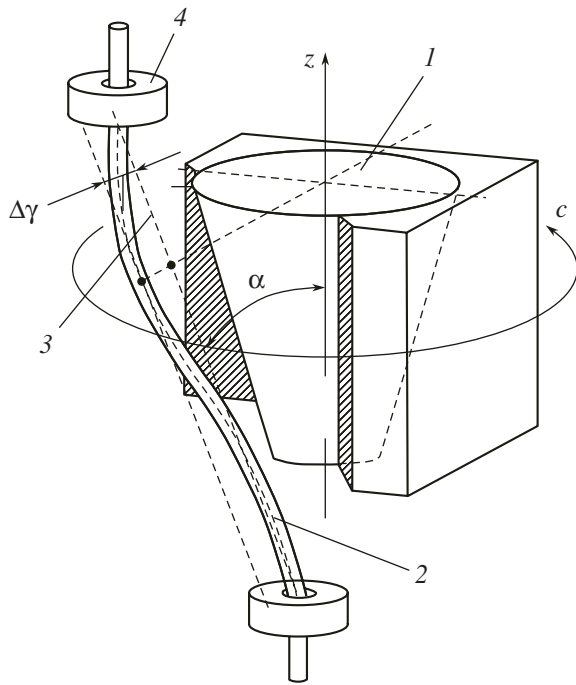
Scheme of the treatment of conical surfaces by virtue of a four-coordinate electroerosion machine: 1 is the treated workpiece; 2 is the wire-electrode tool; 3 is the theoretical position of the WET axis; 4 is the system of the WET guiding; α is the specified inclination angle of the WET axis with respect to the workpiece surface; $\Delta\gamma$ is the value of the WET shift with respect to the initial position at the point of contact with the workpiece; and c is the direction of motion of the electrode wire around the z axis.
